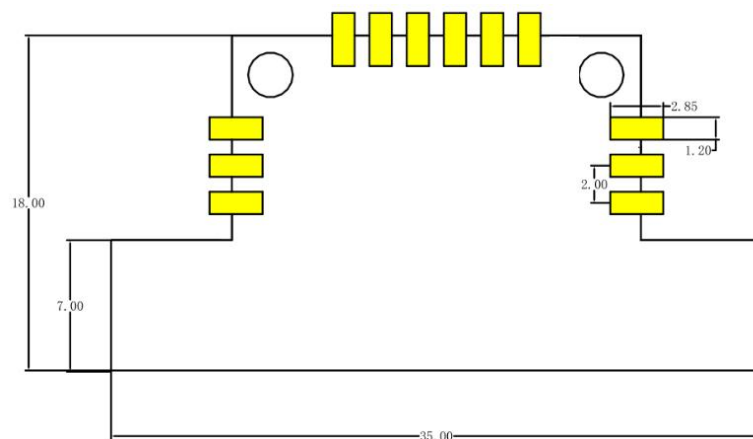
Recommended PCB Footprint Dimensions (Unit: mm)
